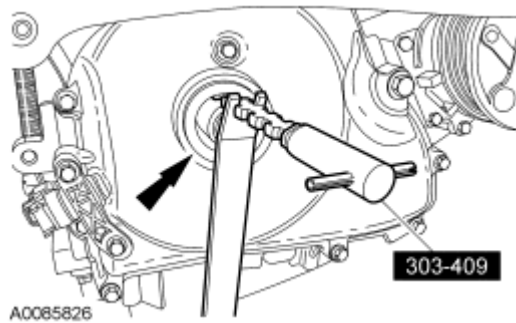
Locating Crankshaft Front Oil Seal And Special Tool (303-409)
